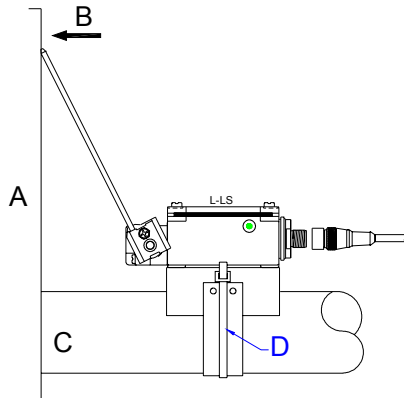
Lynx™ Mold-Closed Limit Switch L-LS side view
